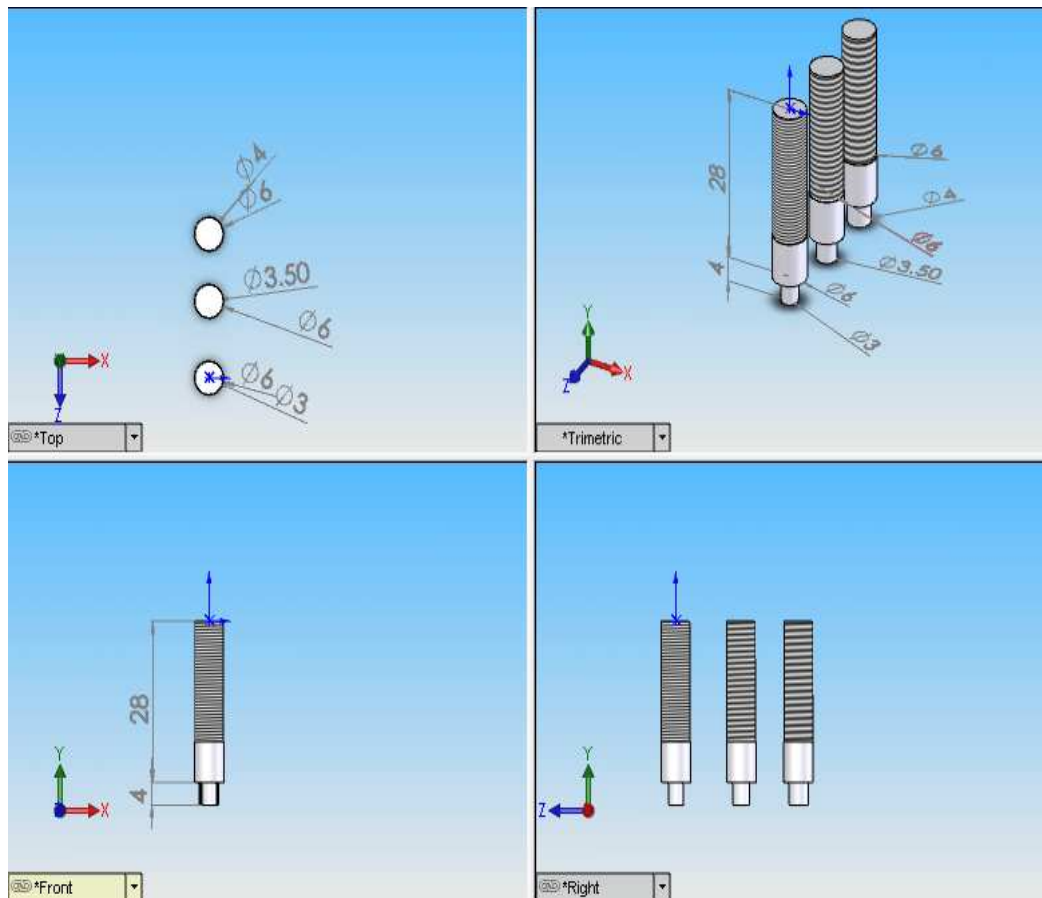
Engineering Drawing Of Precision Hole Punch
